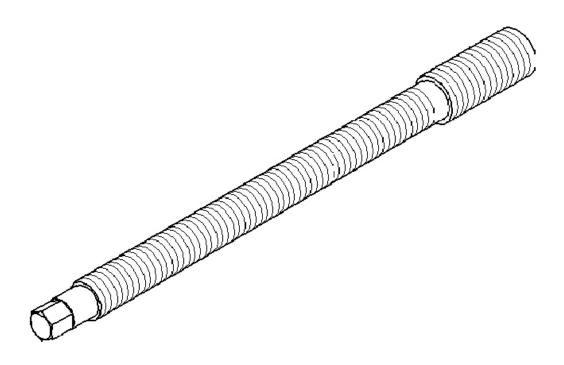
Crankshaft Damper Installer Screw 8179 Courtesy of CHRYSLER LLC
